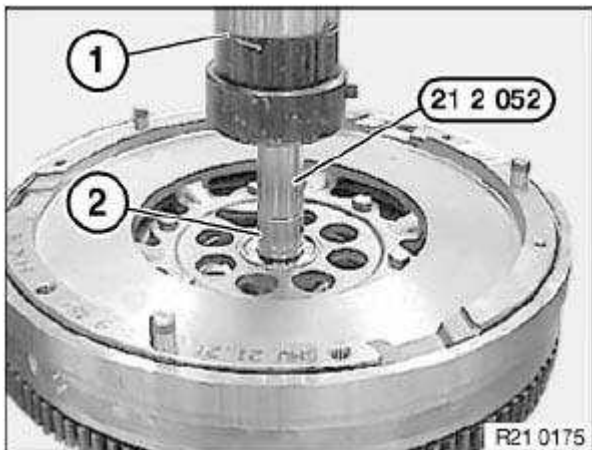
Roller Bearing, Hydraulic Press And Special Tool 21 2 052
